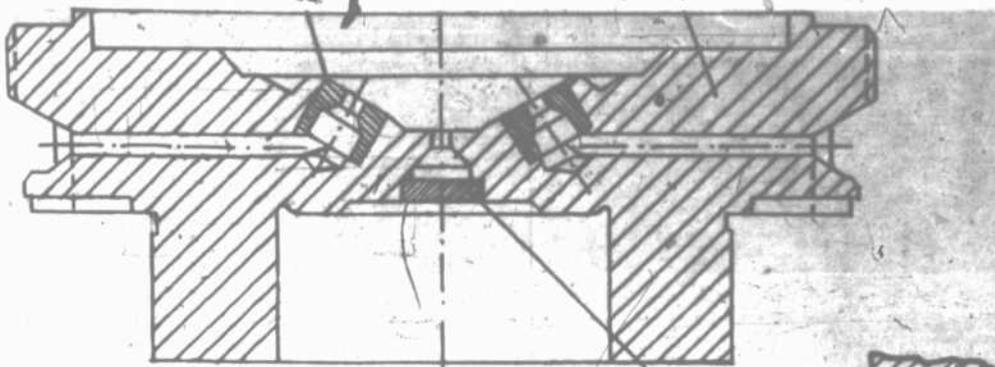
Assembly Drawing of Rocket Engine Injector Details
